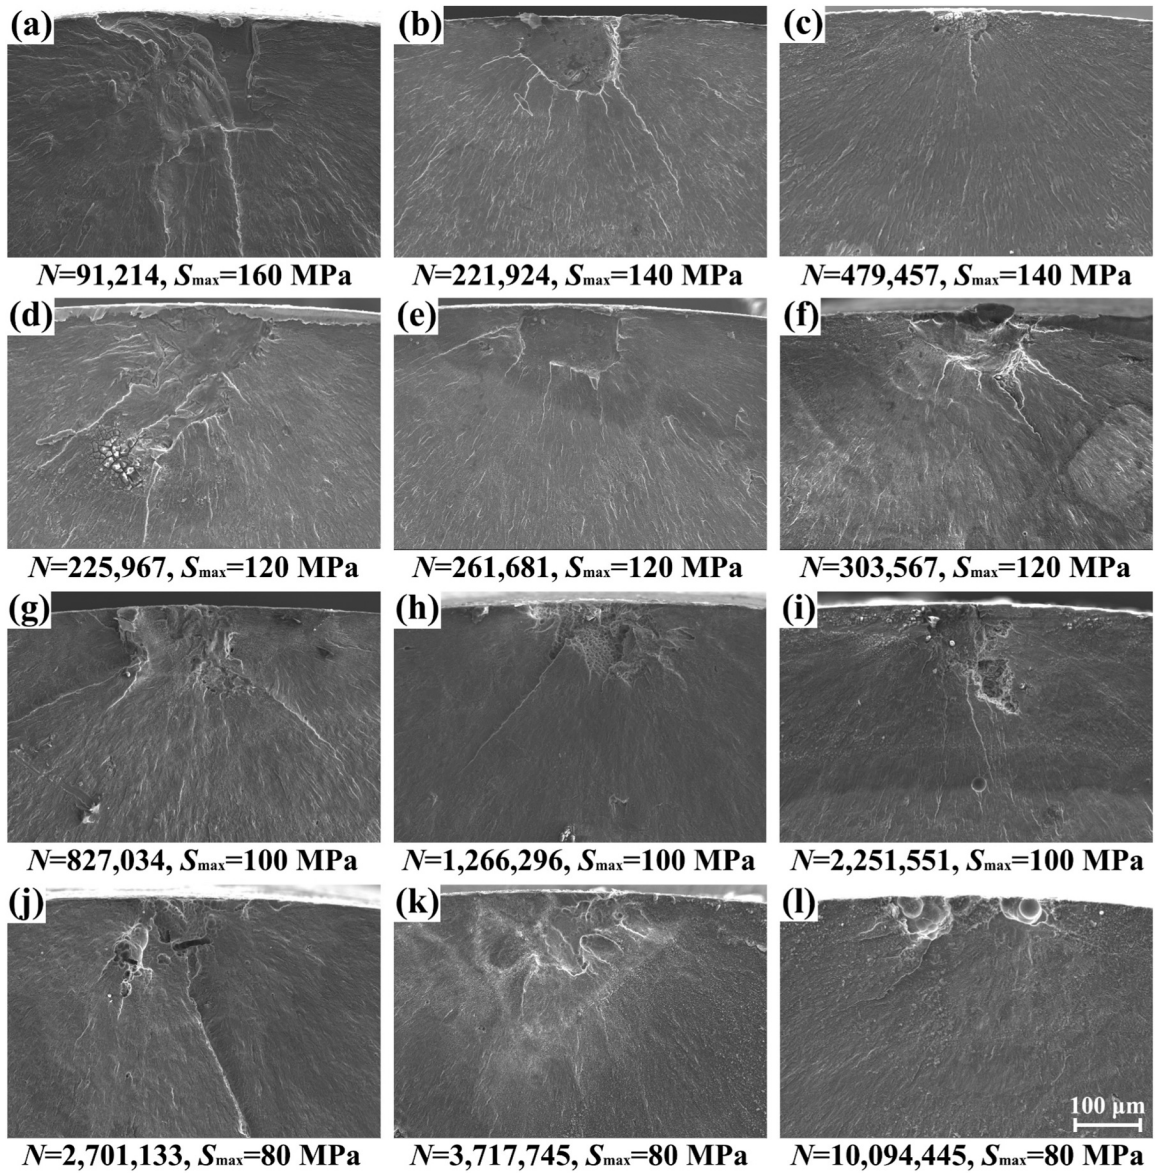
Fatigue initiation regions of the CF-SLM specimens. (a-l) refer to each of the fractured specimen
